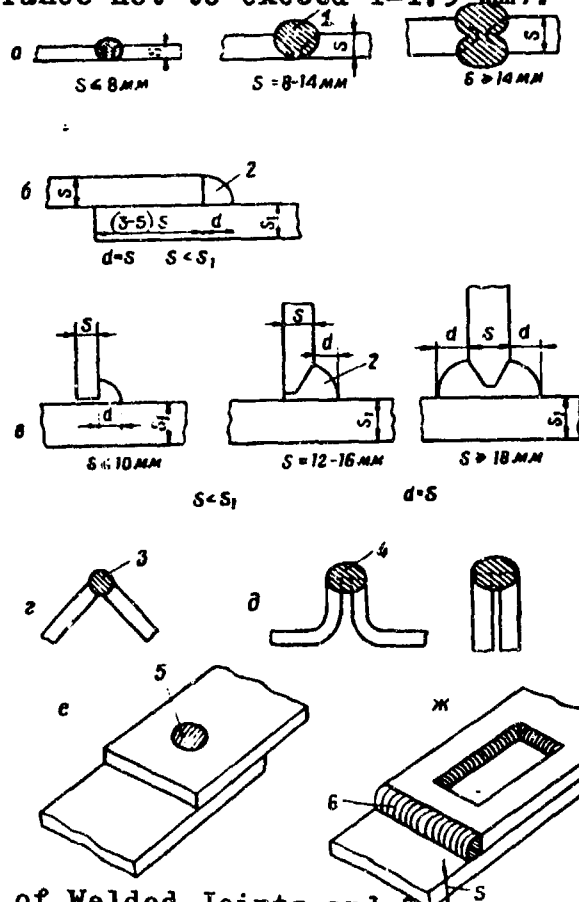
Types of Welded Joints and Seams: a - butt joint; b -
